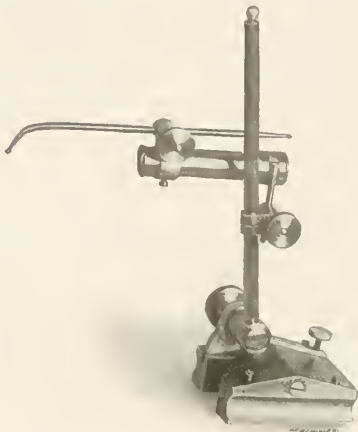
Xander Electric Test Indicator mounted on Surface Gage
